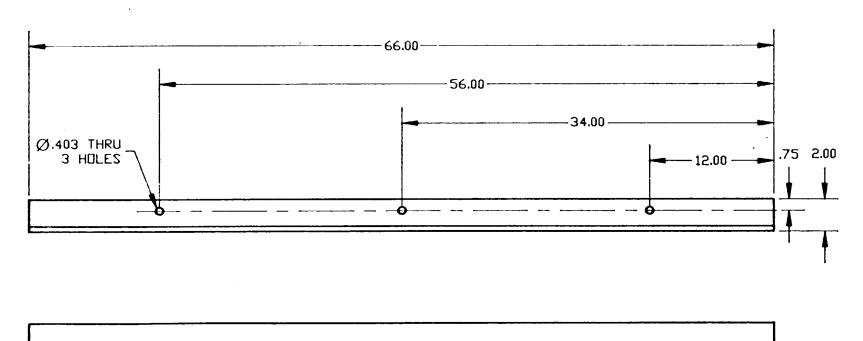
Tool Box Rack Assembly Part Number 20089720-6 (Sheet 6 of 11)
